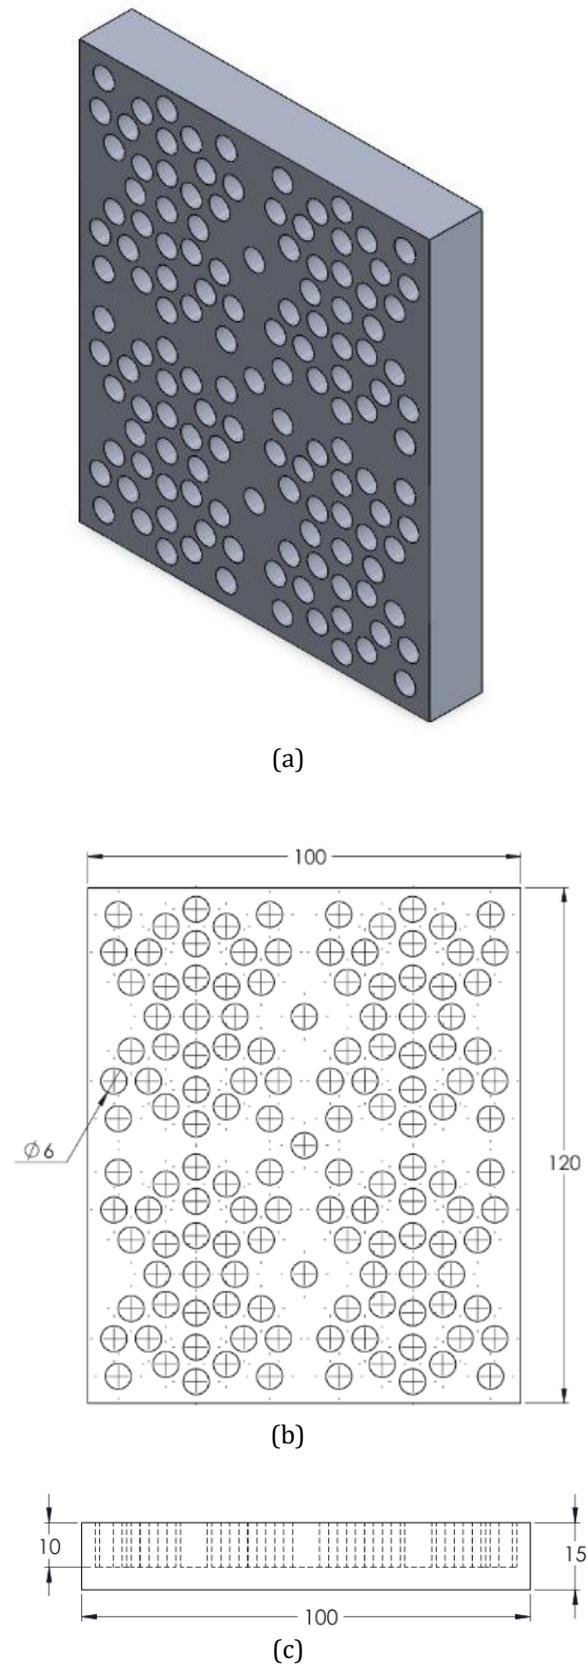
Workpiece of Sample 2 (a) isometric view (b) front view (c) bottom view
